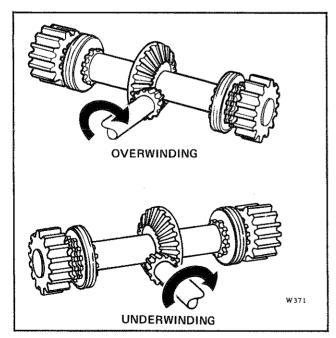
BEVEL GEAR SHAFT OVERWIND AND UNDERWIND ARRANGEMENT
